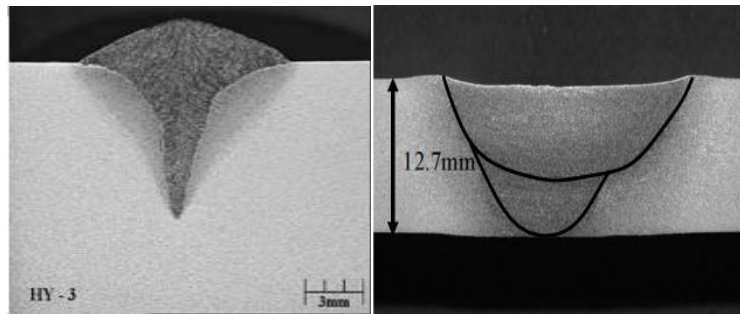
Macrographs of hybrid keyhole (left) and conduction (right) welds ¹⁵⁵
